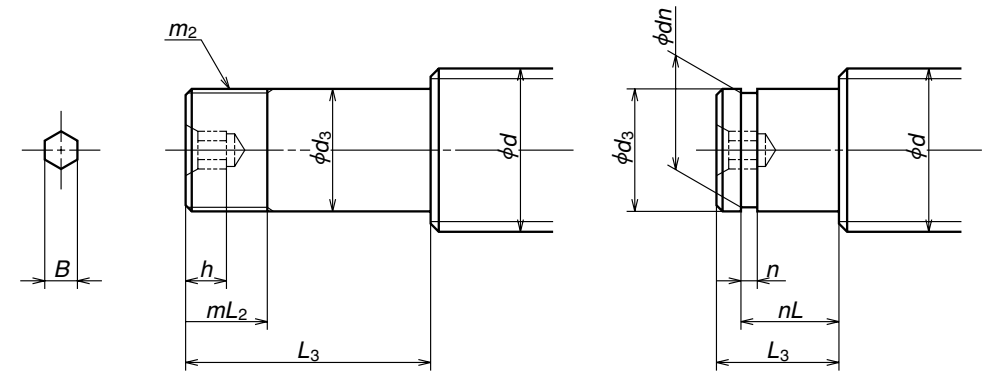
Configuration of standard shaft end (drive side)
